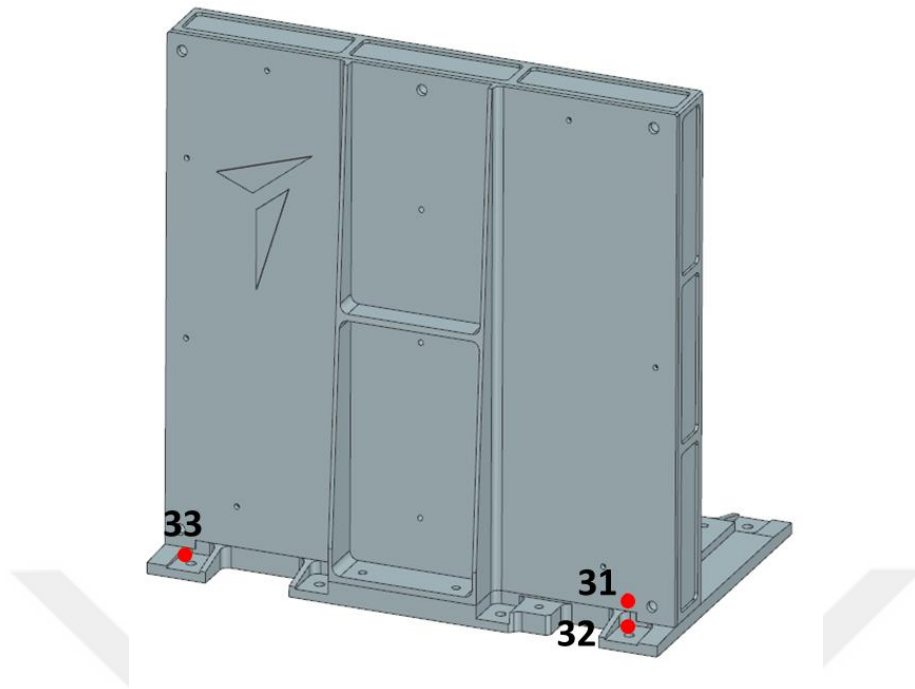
Thermocouple layout on rear side of aluminum parts.
